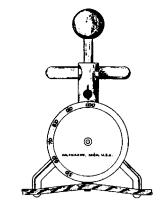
Belt Tension Gauge (Part No. 07-00203)
